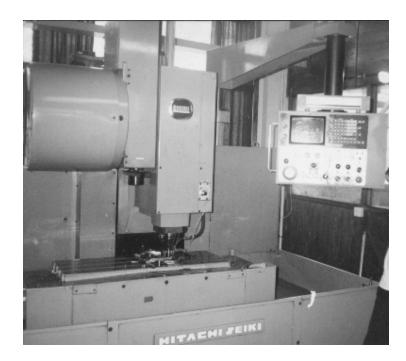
Hitachi Seiki VA35 CNC Machining Center
